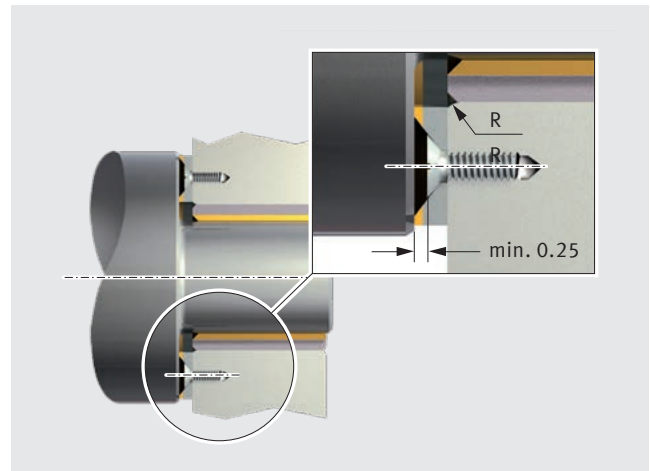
Attaching a PAW thrust washer without a recess in the housing
